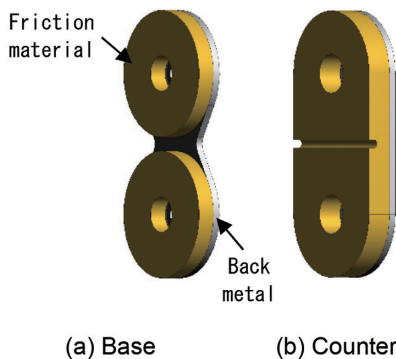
Shape of improved friction material block for brake squeal⁵⁾
